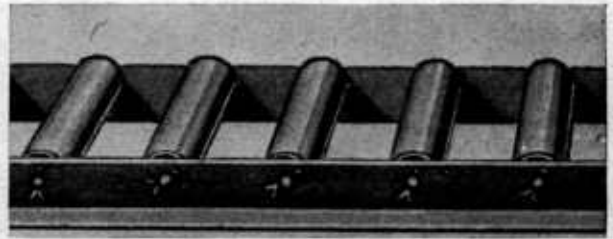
Series of dead rolls, used by mills with or without edgers.
